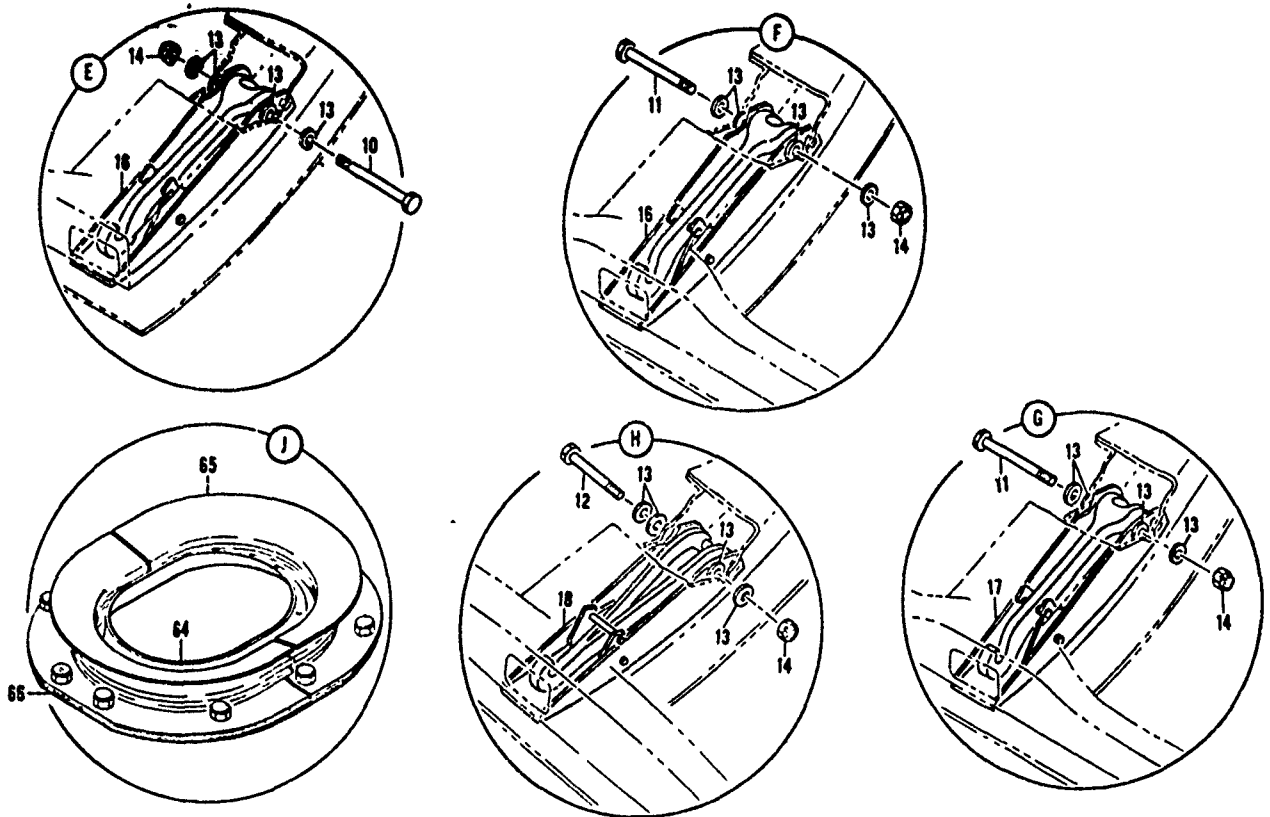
Engine Nacelle Left Hand Side Cowl Panel Assembly (Sheet 2 of 2)
